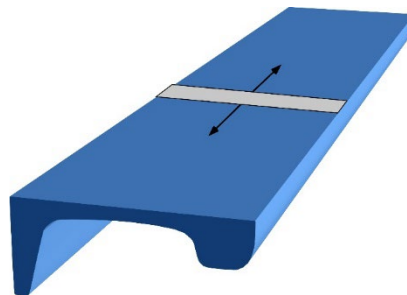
Proposed rail specimen for longitudinal stress measurements: cut along mid-section of the rail
